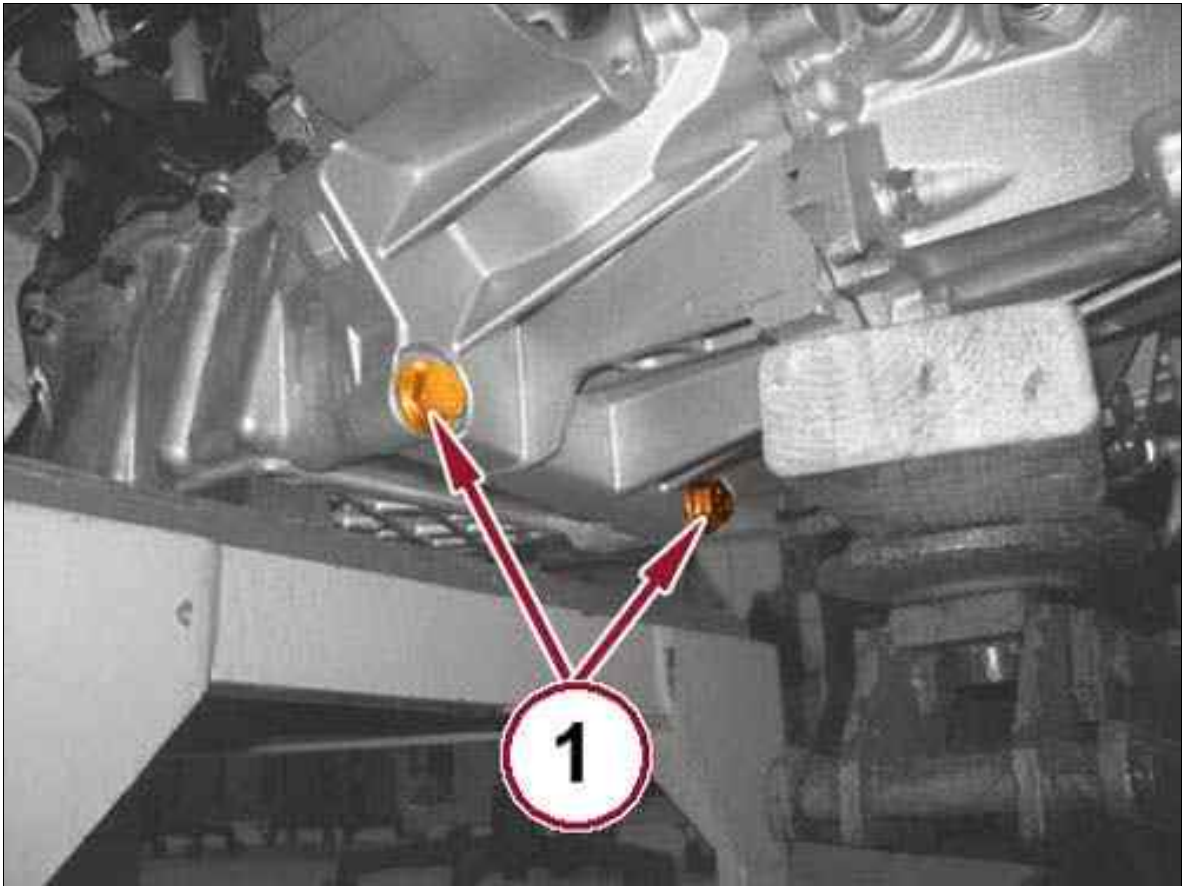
Gearbox To Engine Bolt & Flywheel Upper Guard
